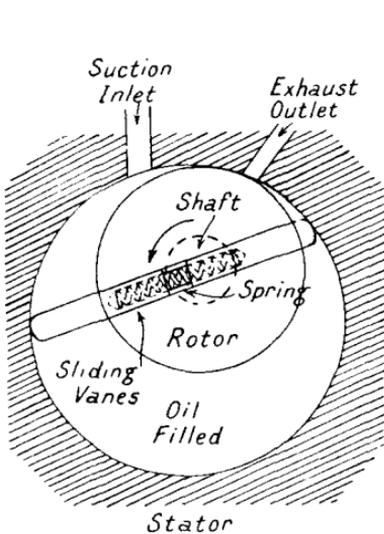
A.—Rotary vacuum pump with the vane in the rotor.
